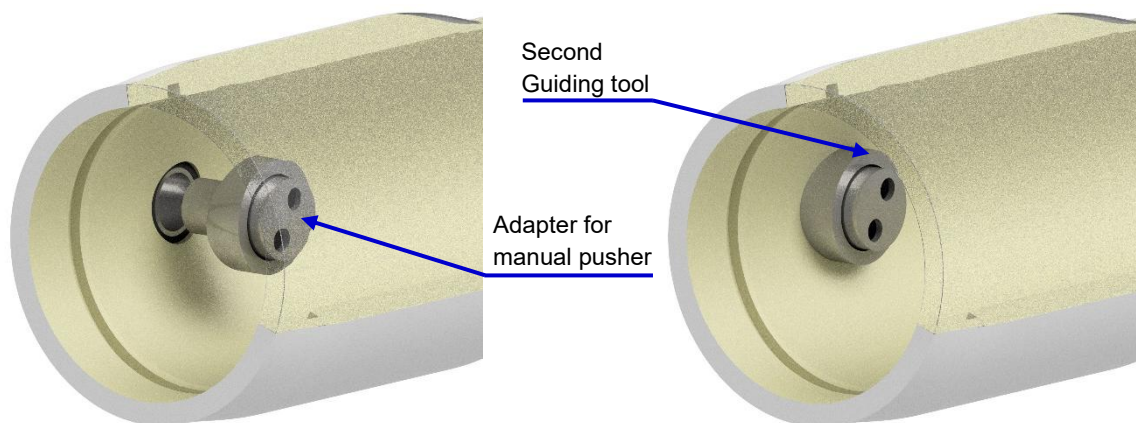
From now on, we will refer to this set of parts as the port mounting package.
